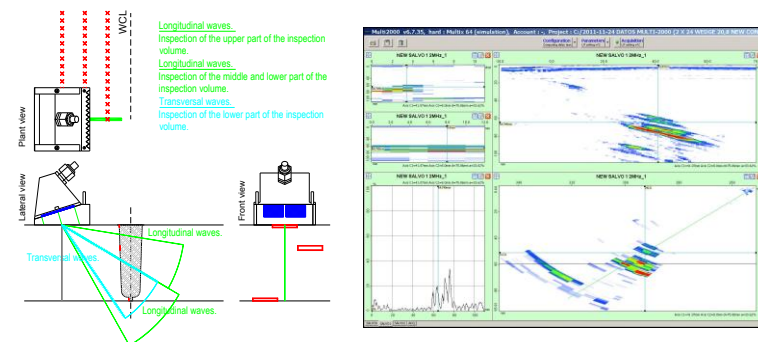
Scanning for detection of defects parallel to the weld
